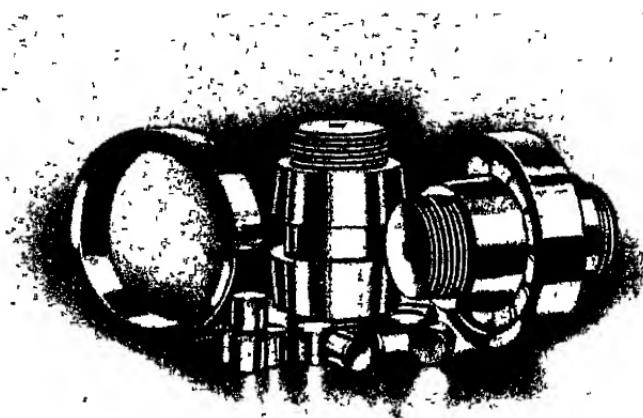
A. ROLLER BEARINGS APPLIED TO BIG END OF
